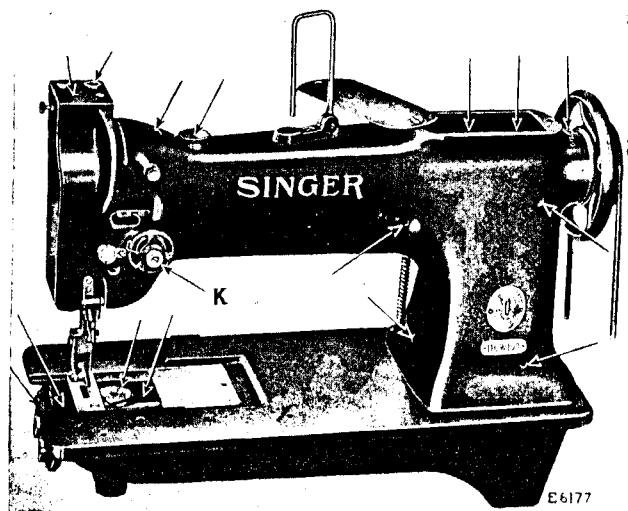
FRONT VIEW OF MACHINE, SHOWING OILING POINTS
